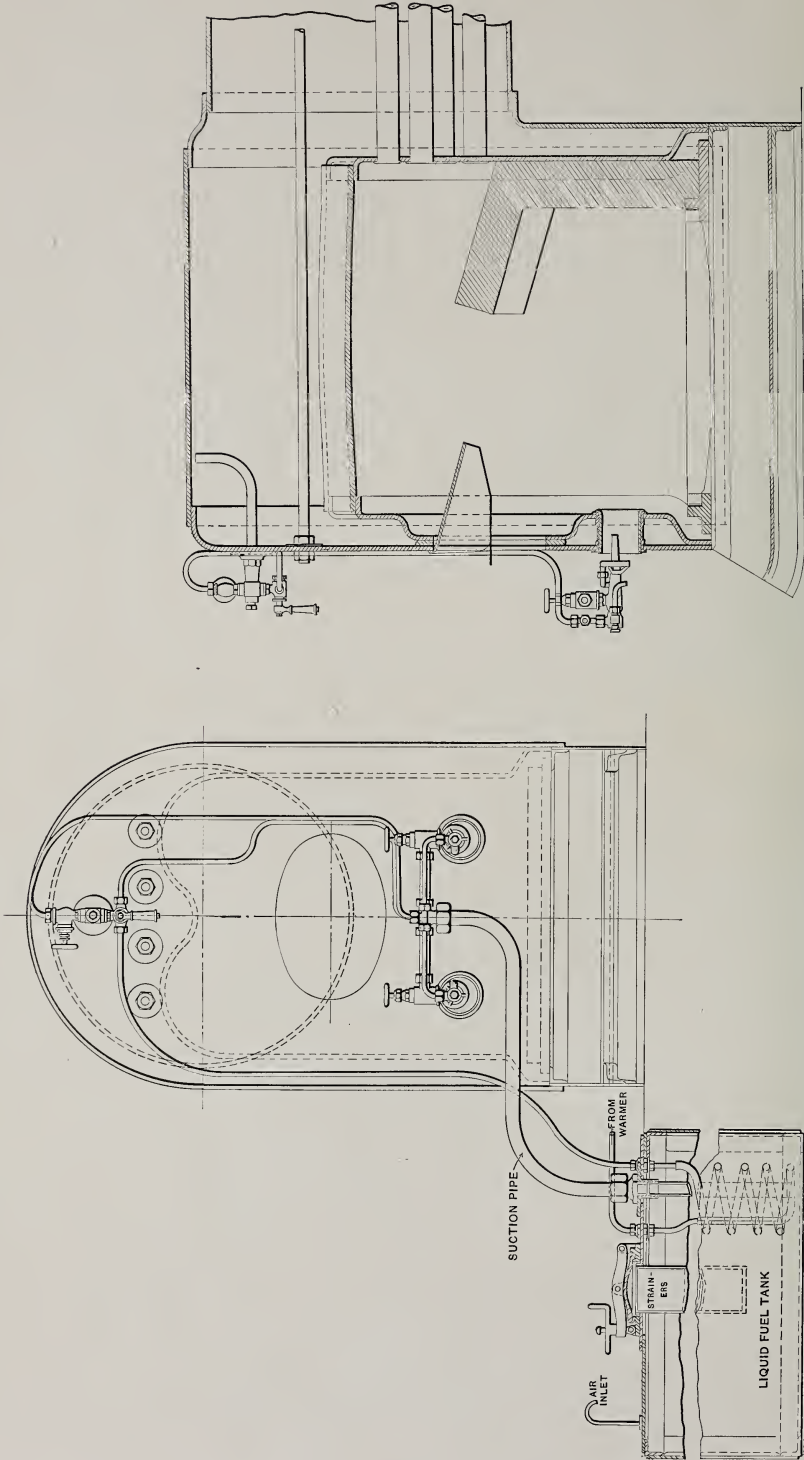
HOLDEN'S APPARATUS FOR BURNING LIQUID FUEL FITTED TO A STATIONARY BOILER
